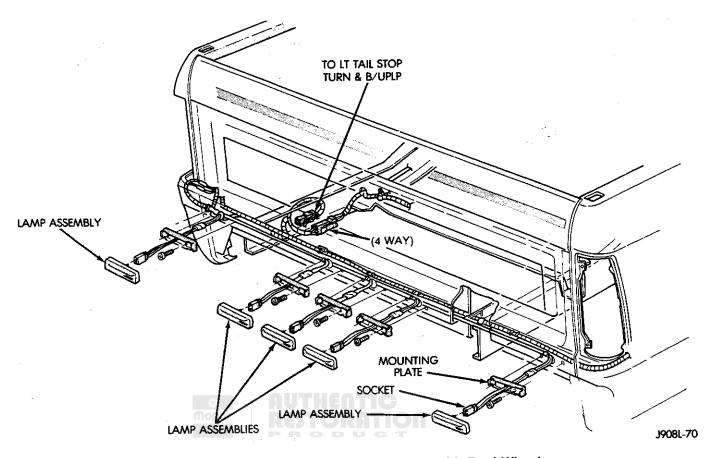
Rear Clearance Lamps—Sweptline with Dual Wheels
